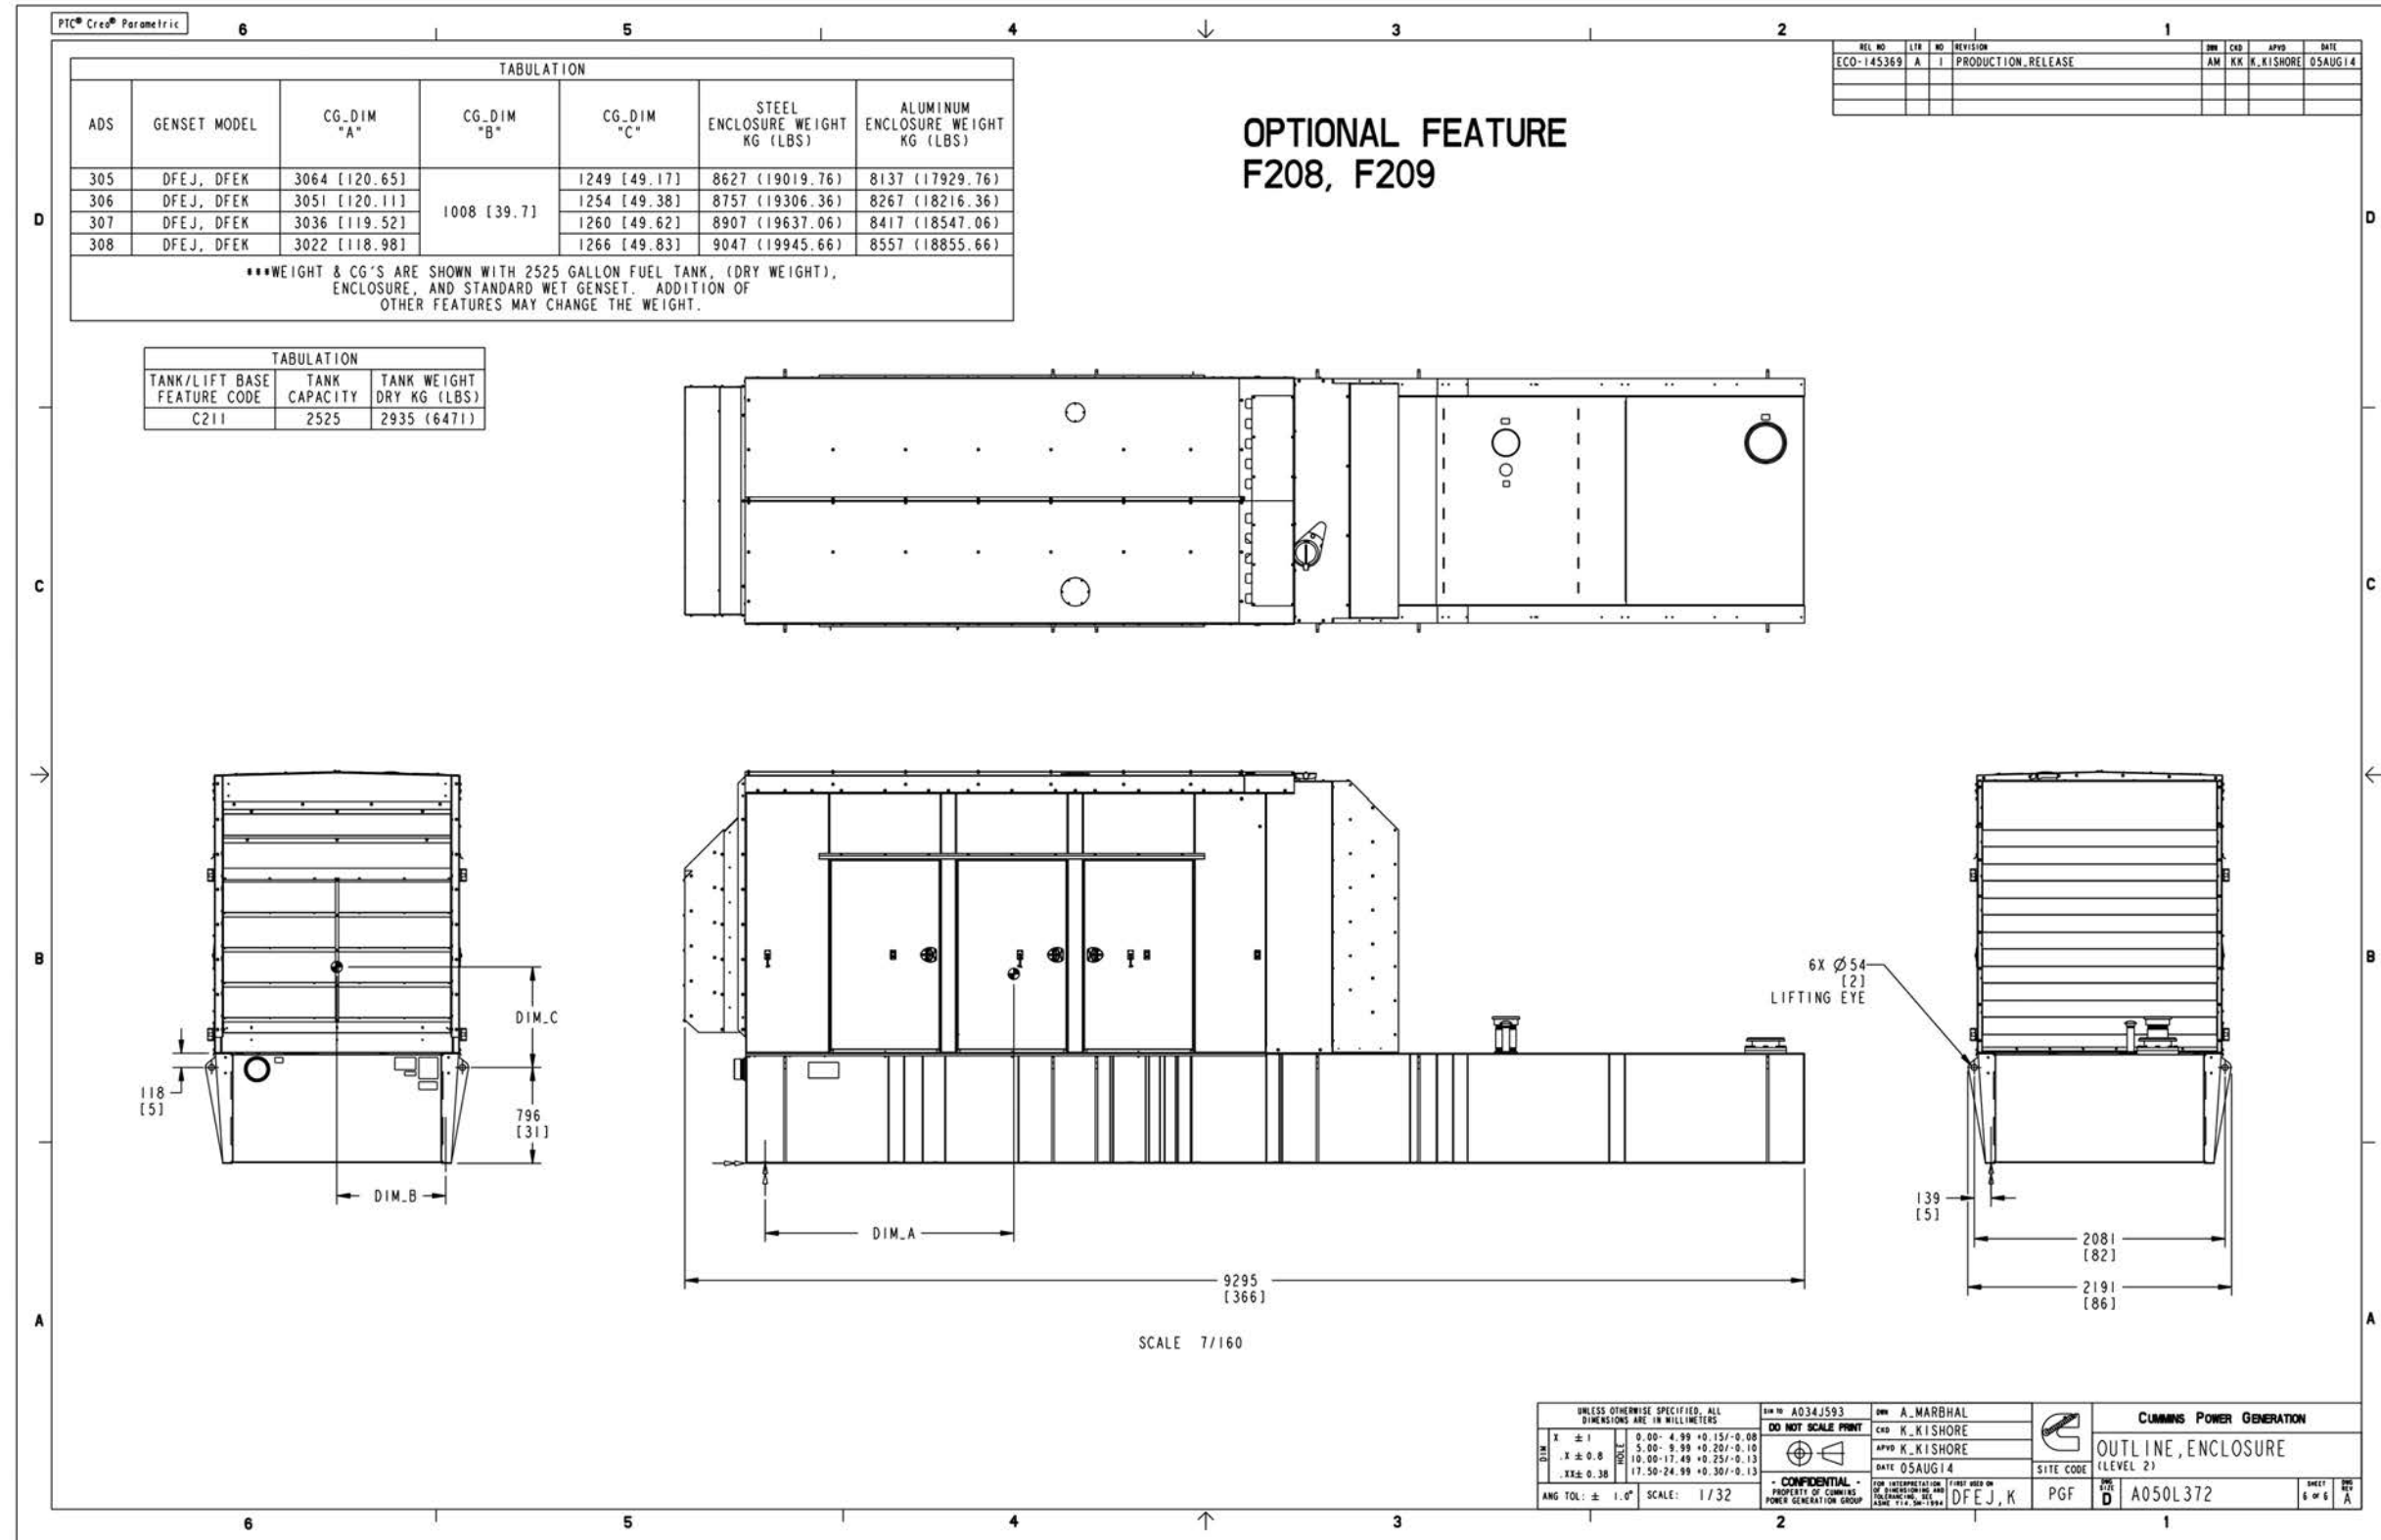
ENCLOSURE OUTLINE DRAWING (F202, F205, F206, F208, F209) (SHEET 6)
